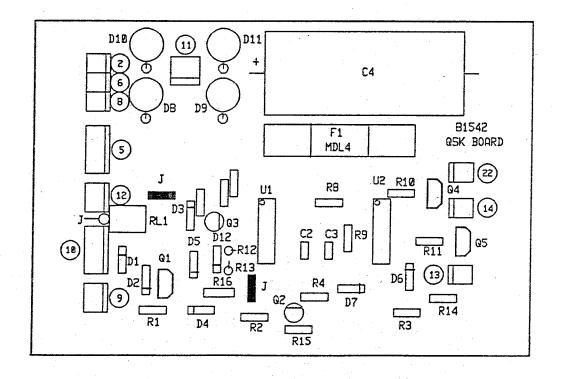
81542 QSK BOARD COMPONENT LAYOUT
